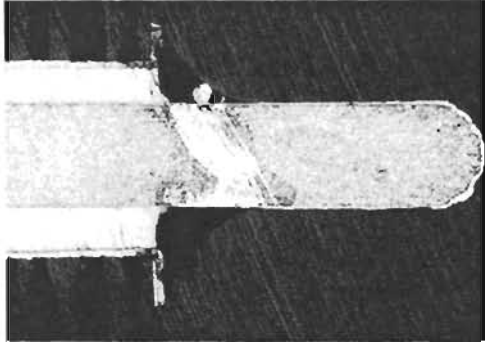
Microsection showing solder ball after pin-in-hole-reflow (EPS)
